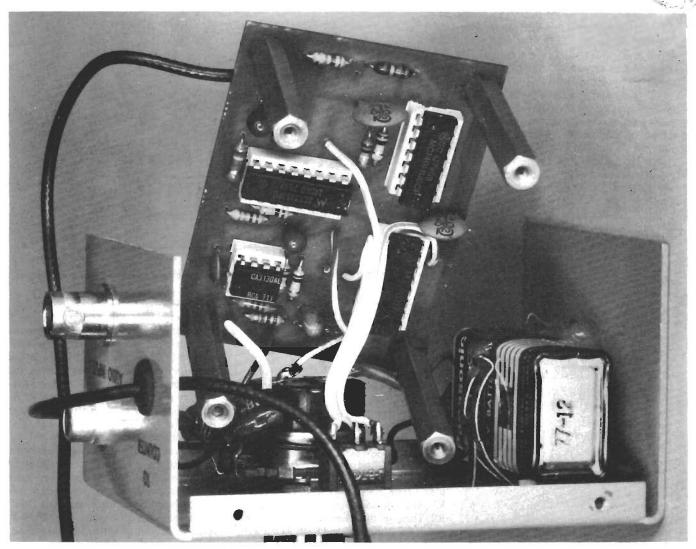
1 $\frac{1}{2}$ -INCH threaded spacers are used to attach PC board to top of case.
